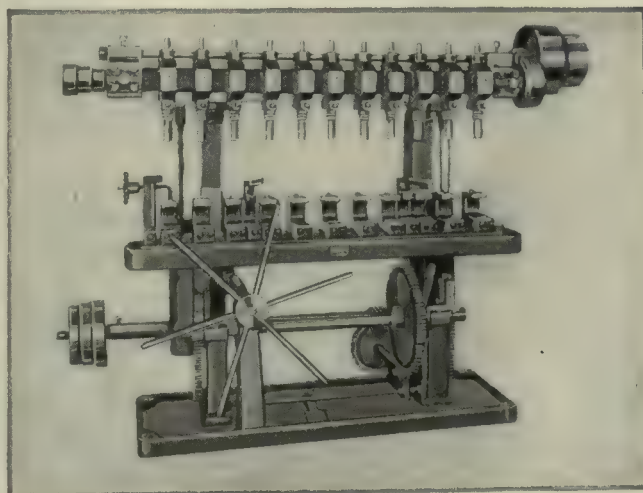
FRONT VIEW OF HEAVY DRILLING MACHINE WITH WORK REMOVED FROM FIXTURES
